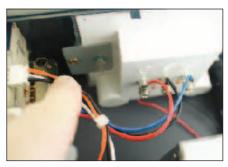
Inside the cabinet, you will have to remove one Phillips screw to remove the meter movement from the case.
